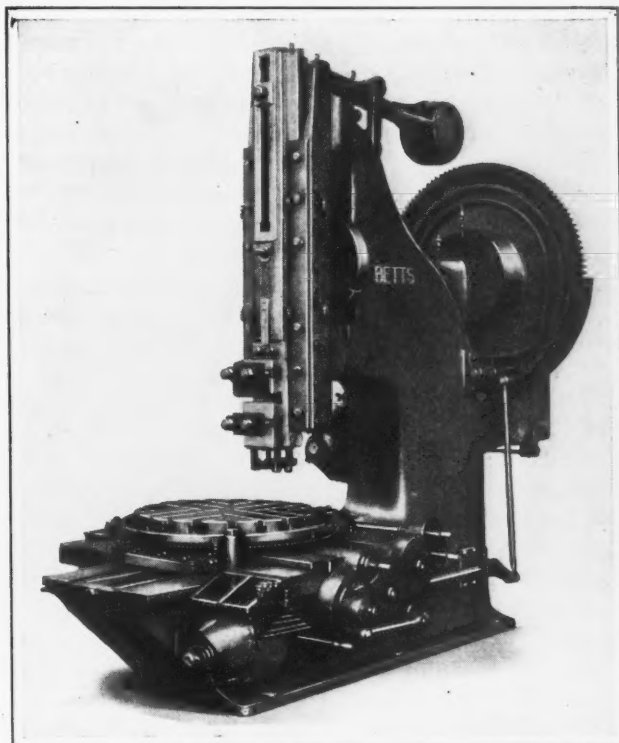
Motor for 16-inch Crank Slotter Mounted on Side of Column (One End Bell of Motor being Visible). A Similar Motor Located Near the Base Drives the Table
